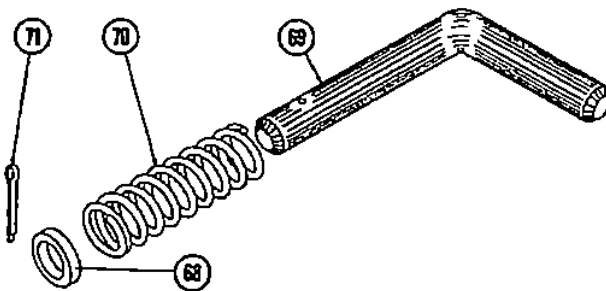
INTERNAL PARTS FOR WING SAFETY LATCH
